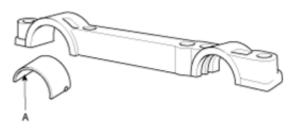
Identifying Exhaust Camshaft Upper Bearing Courtesy of KIA MOTORS AMERICA, INC.
